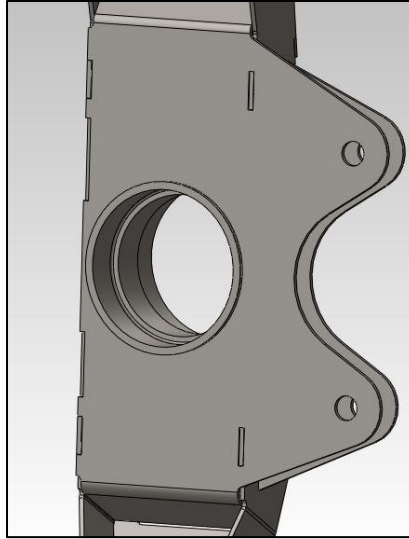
Tongue-and-Groove Joints for Self-Jigging
